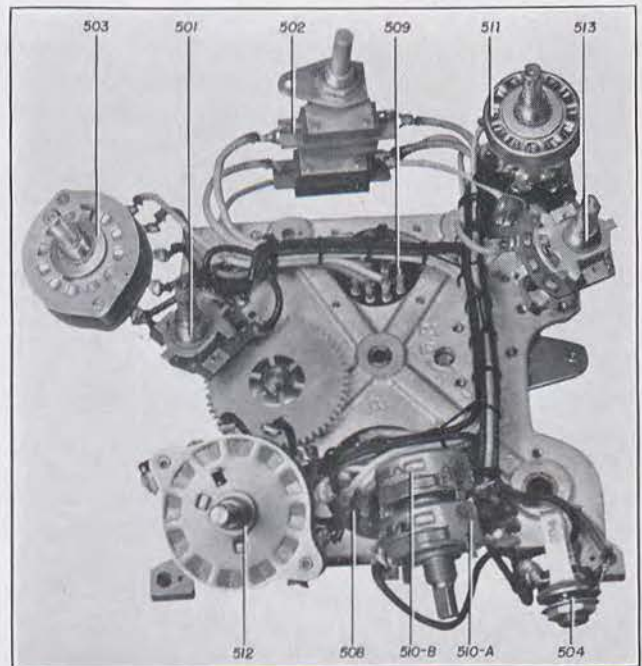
RADIO CONTROL BOX BC-226-A OR BC-351-A, EXPLODED FRONT VIEW SHOWING ELECTRICAL COMPONENTS
